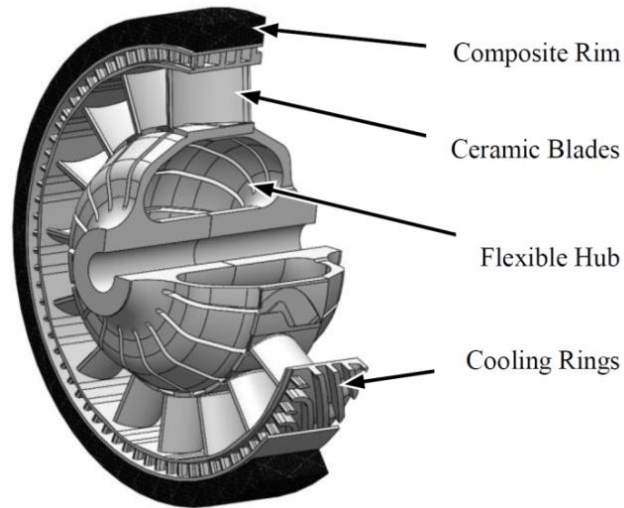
Section view of a flexible hub and rim rotor configuration ([9])
